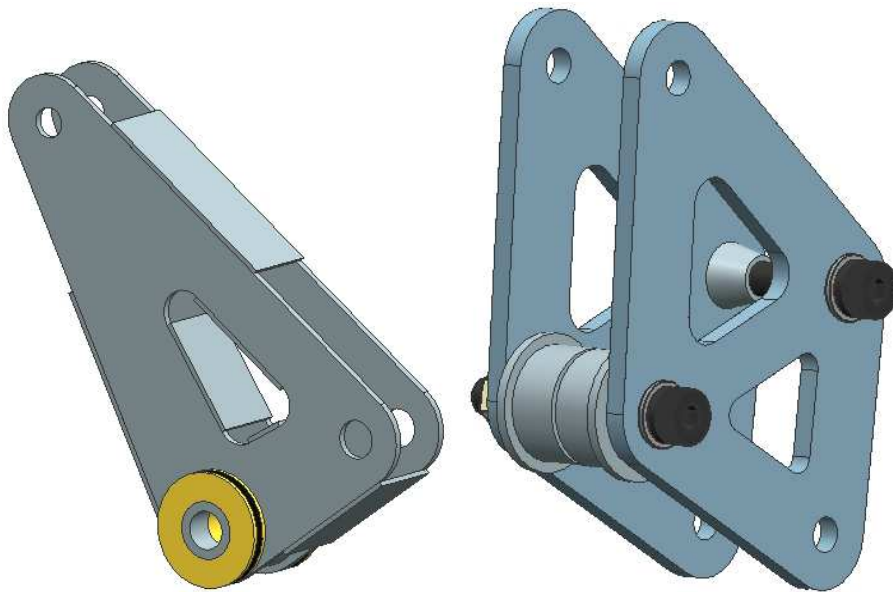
Front (left) and rear (right) bellcranks, with fasteners
